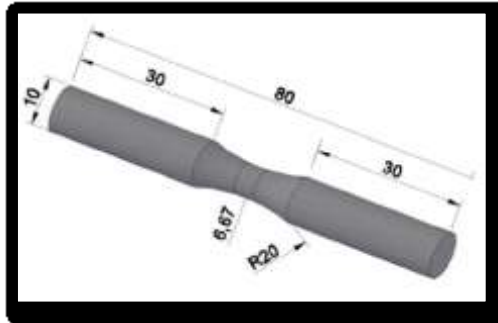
Geometry of Fatigue Specimens; Dimensions, in Millimeter according to (DIN 50113) Standard Specification
